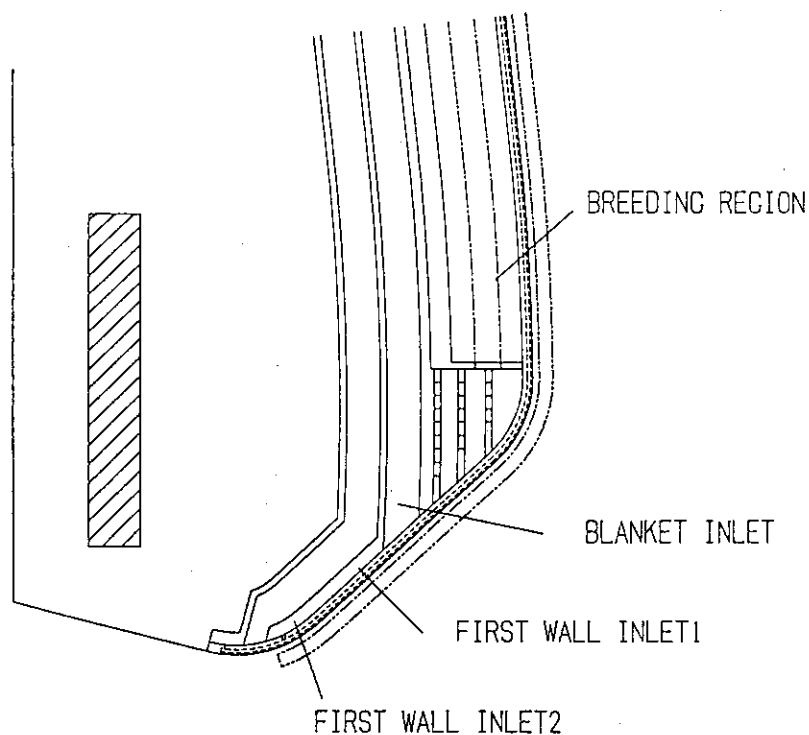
Coolant manifolds on the bottom of inboard blanket
